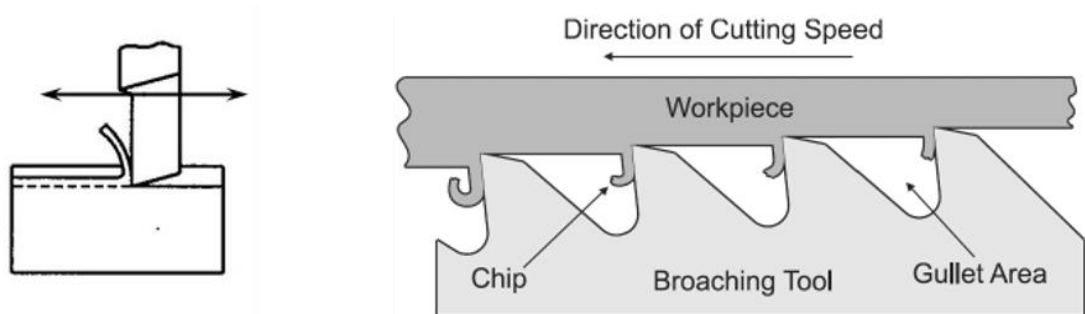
Representation of: Right Shaping tool [15]; Left: Broaching tool [16]
